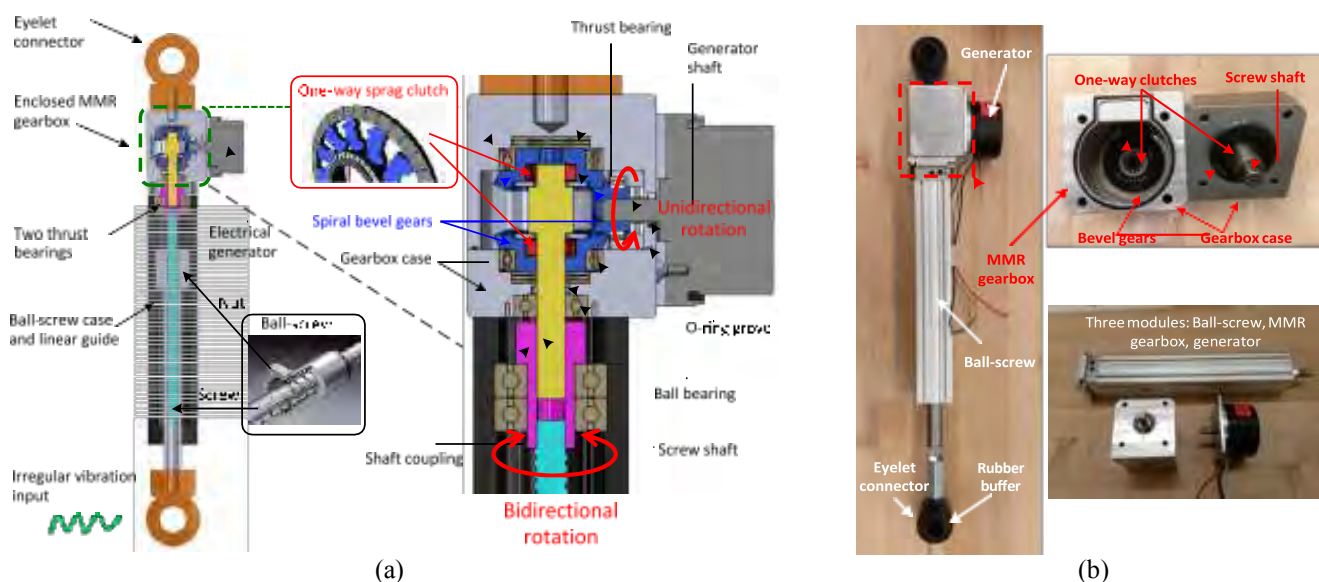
The design of an MMR-based energy-harvesting shock absorber using a ball-screw mechanism (a) Design drawing (b) Built prototype
